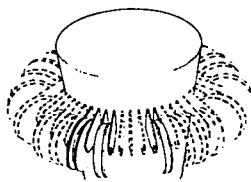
(1). Cable Storage Segments Final Assembly
